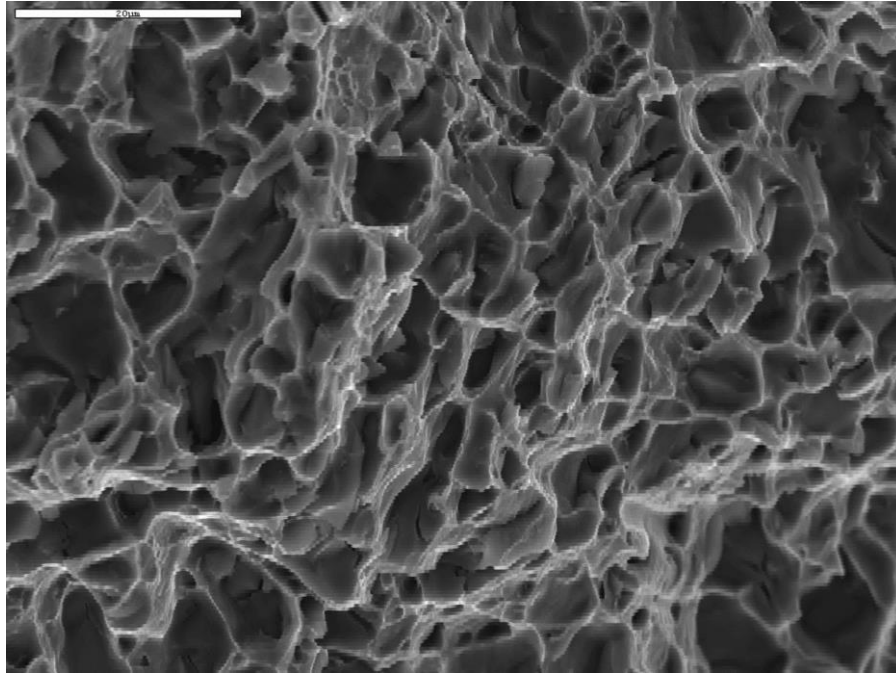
SEM fractograph indicating the ductile fracture for the remaining parts of A356 alloy uniaxial specimen.
